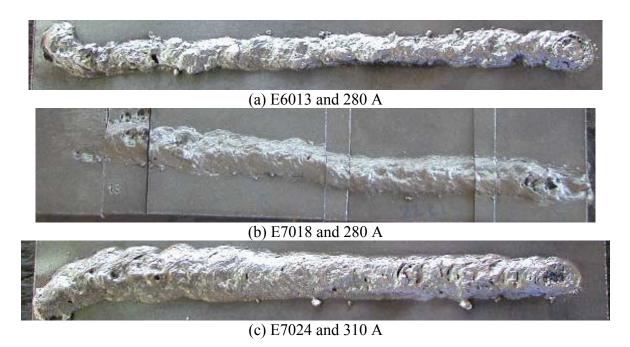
Pictures of the bead-on-plate wet welds deposited with the three electrode types with electrode negative on A572 Gr. 50 steel plates at 100 m.
